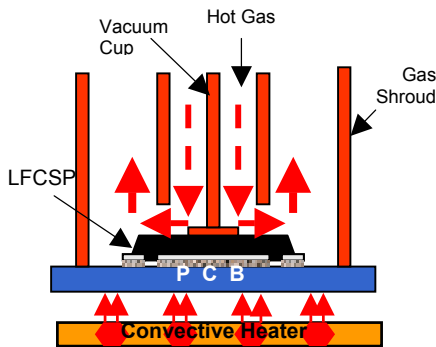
Solder is reflowed and the LFCSP is withdrawn before solidification
